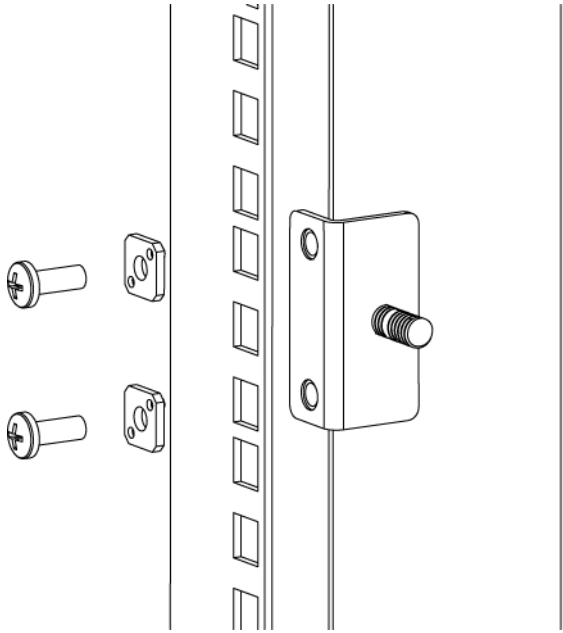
Installing the rear mounting brackets (HPE 10000 Series Rack)
